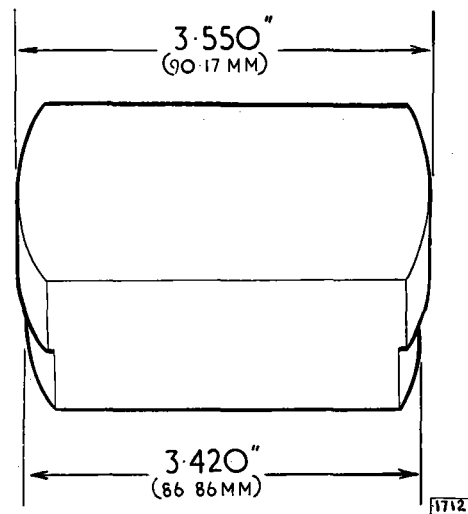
Stepped block for 3.8 litre cylinder liner removal.
